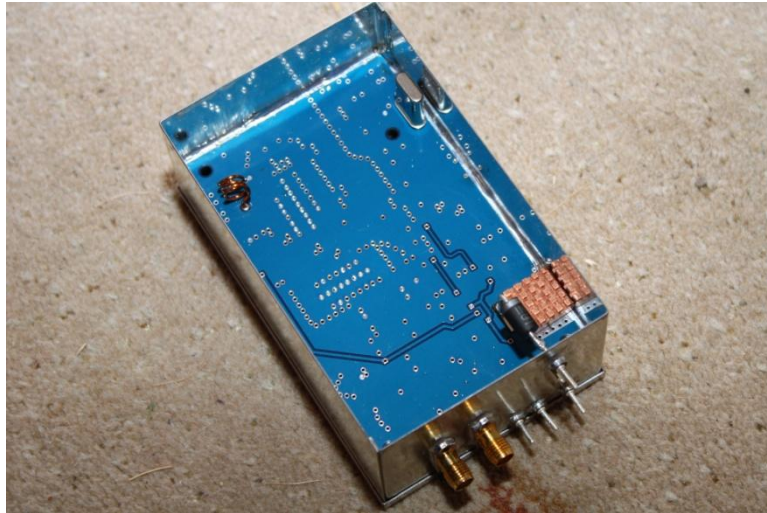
'Top' side of the PCB showing the Crystal, L13 (Alternative coil - see below), copper heat-sink and supply reversal protection diode
